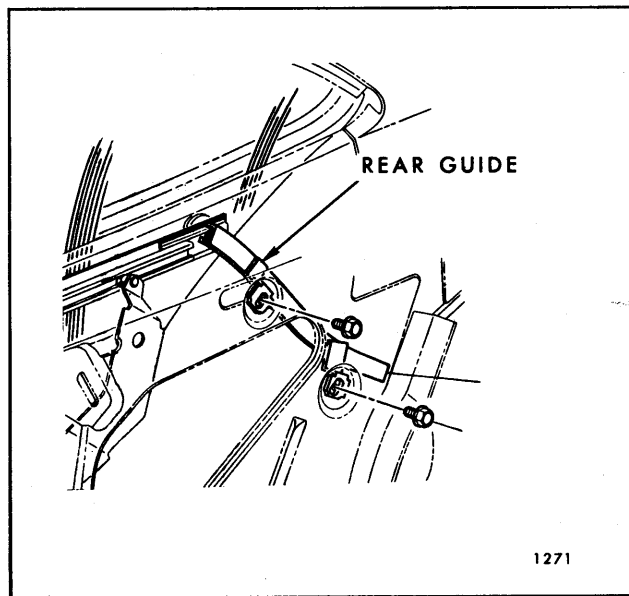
Rear Quarter Window Rear Guide Assembly - "Z-37" Styles
